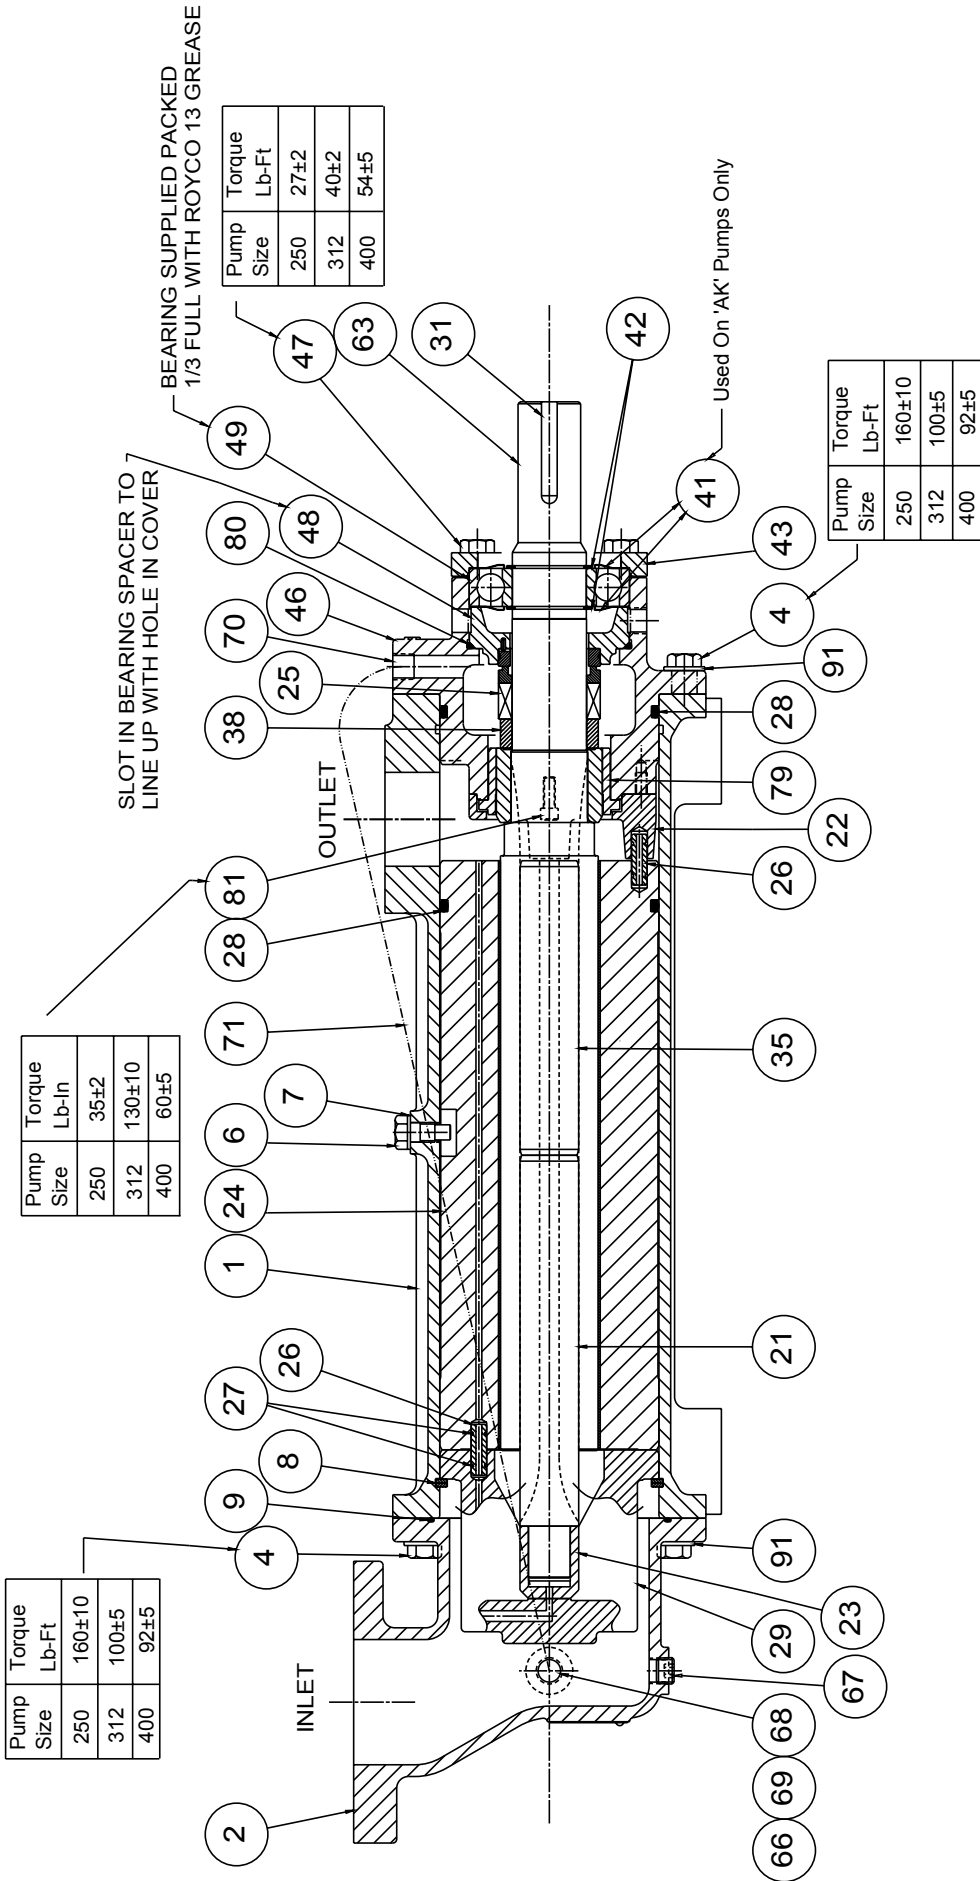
AK6DHz and K6DHz Pump Assembly Drawing
